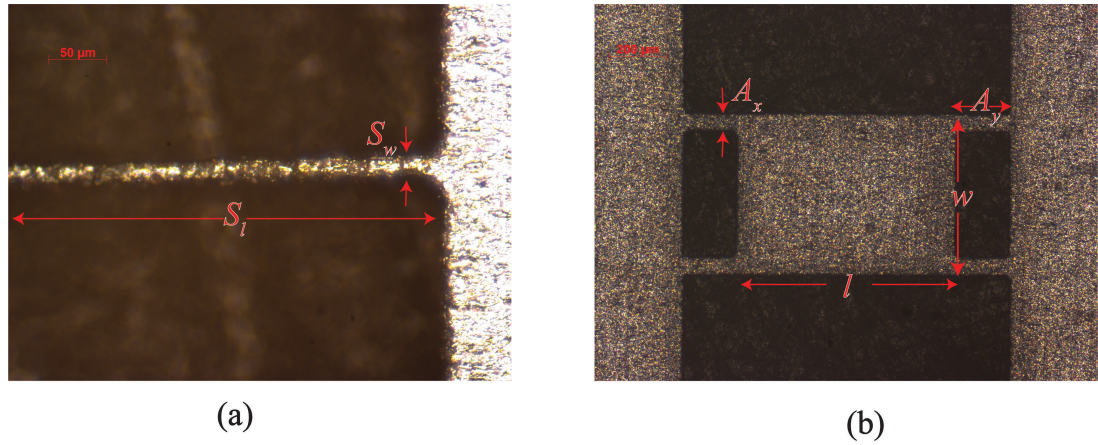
(a) Aluminium strip and (b) bridge used to optimize laser parameters.
